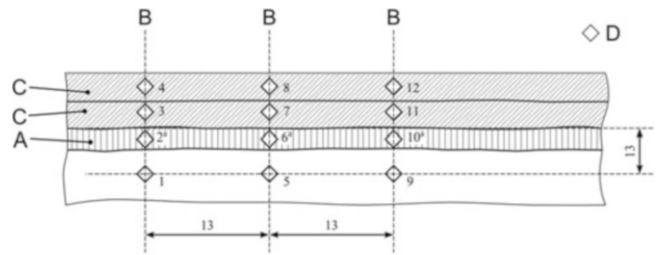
Weld-overlay survey method for Vickers Hardness Measurement (dimensions: mm). (Source: NACE MR0175/ISO15156, Part 2). Key: A weld HAZ (visible after etching). B lines of hardness survey indentations 1 to 12. C layer of weld overlay (visible after etching). D hardness impressions. The Rockwell C hardness measurement method may be used subject to the requirements of NACE MR0175/ISO 15156, Part 2, 7.3.3.2. HRC hardness impressions in the HAZ shall be located within 2 mm of the fusion boundary. ^aUsing the Vickers or Rockwell 15 N measurement methods, hardness impressions 2, 6, and 10 should be entirely within the HAZ and located as close as possible to, but no more than 1 mm from, the fusion boundary between the weld overlay and HAZ
